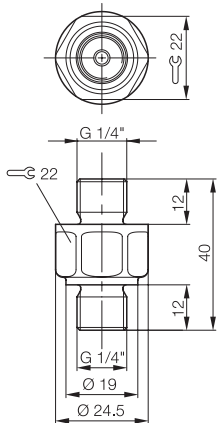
Dimensional drawing of flush-mounted pressure sensors, starting at 100 bar
